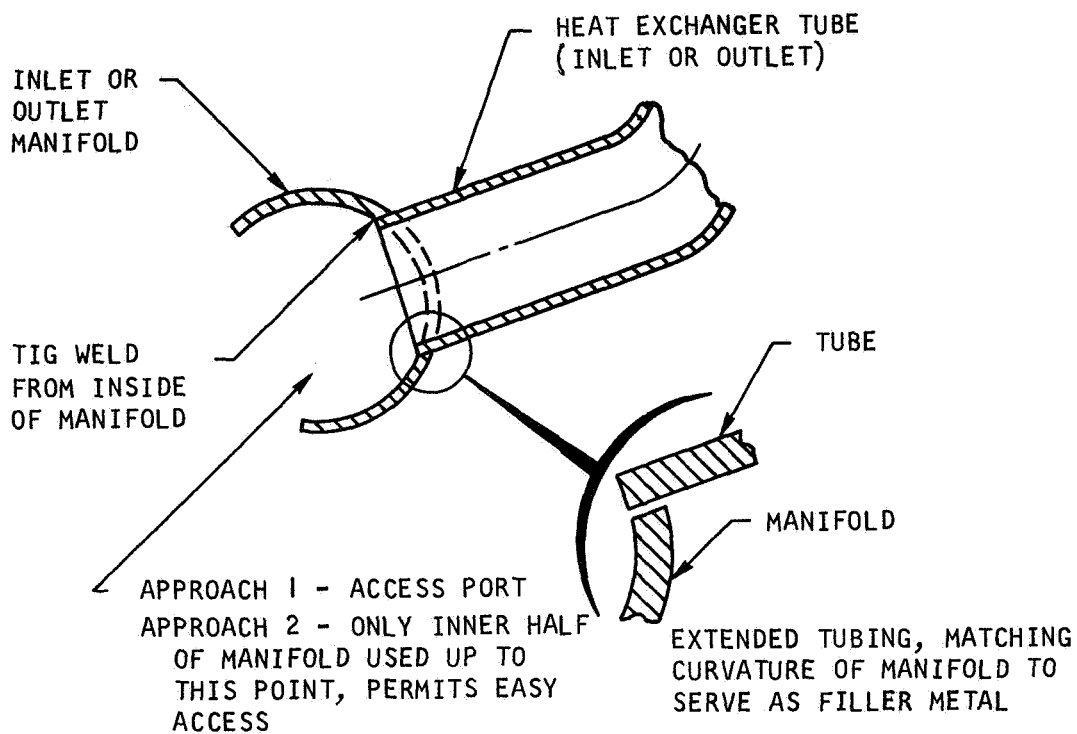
FABRICATION OF OUTLET MANIFOLD
